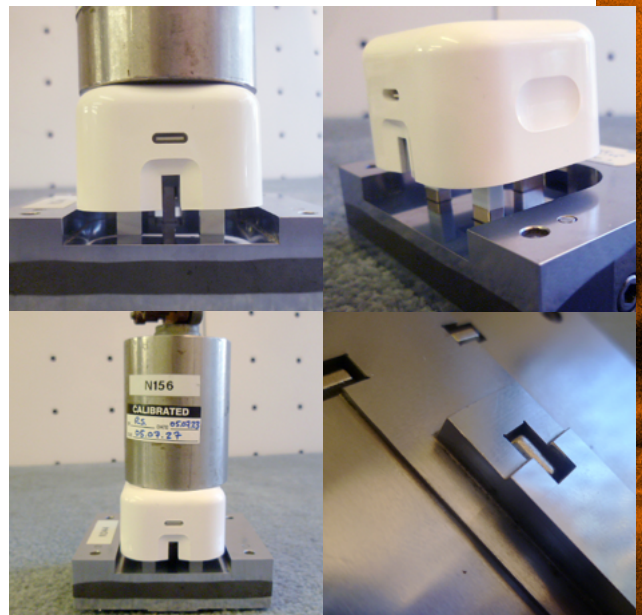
Examples of oversized bodies, short plug pins, and oversized plug pins found during the plug gauging tests.
